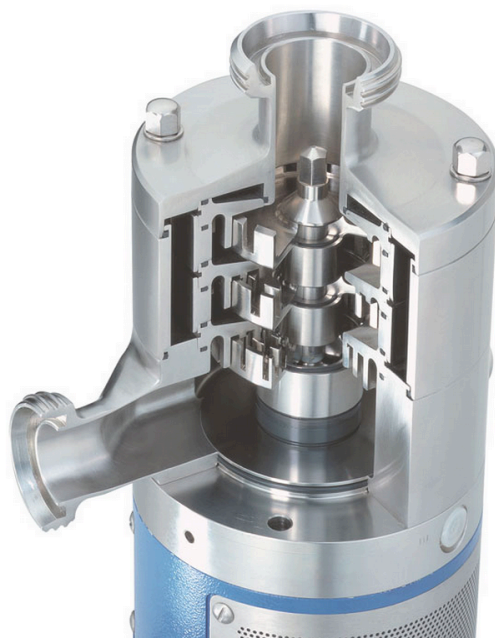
Mixing head rotor of DR module on pump housing and collector plate [19].
